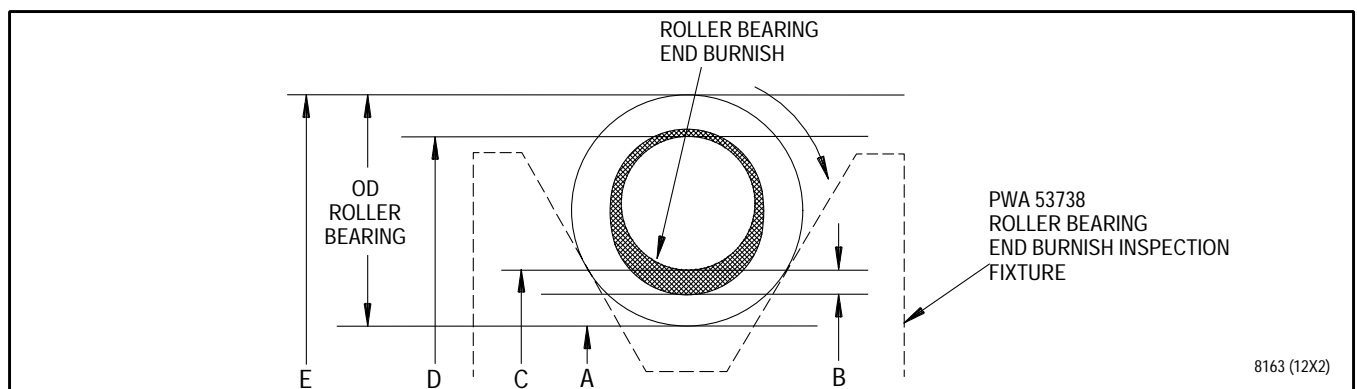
No. 4 Bearing Roller End Burnish - Mechanical Inspection
